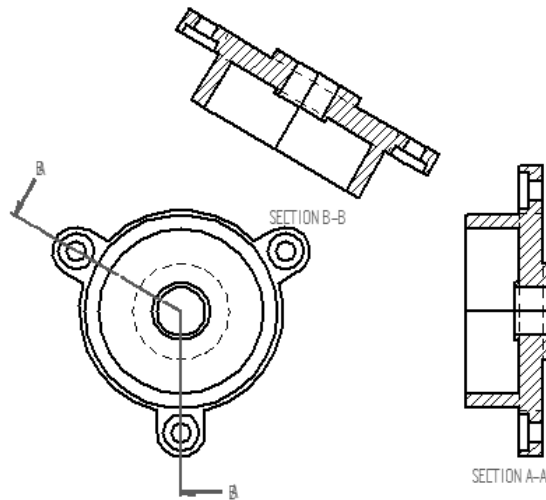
Two different revolved section views generated by selecting two different cutting geometries
